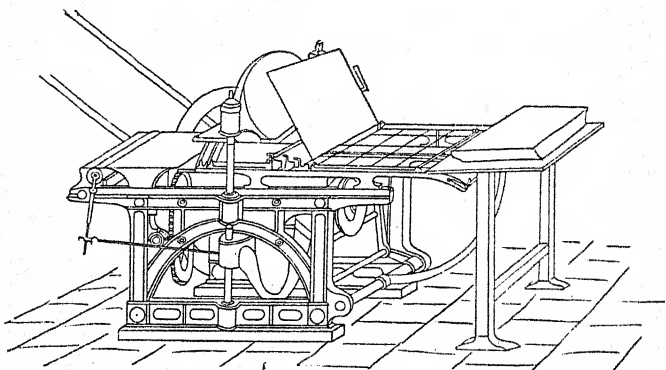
THE "SCANDINAVIAN" PLATEN MACHINE.
